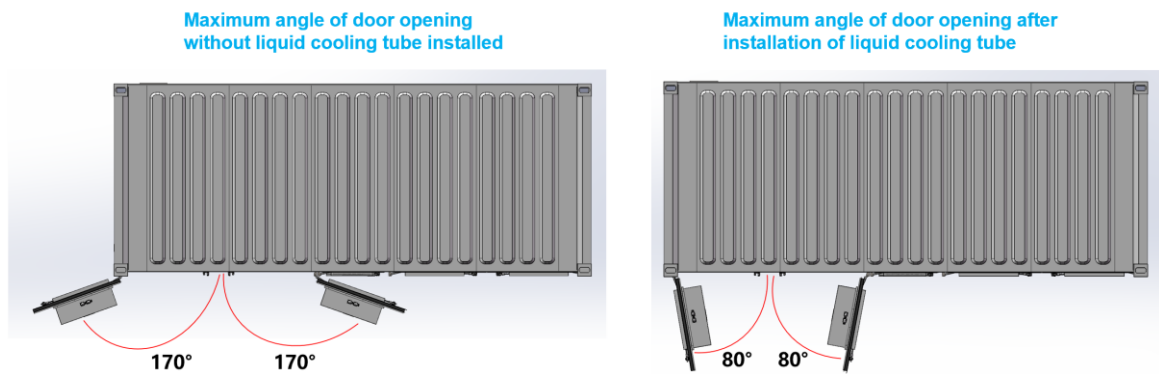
Door swing references without and with liquid cooling tube installed (SolBank arrives onsite with liquid cooling tube installed)
